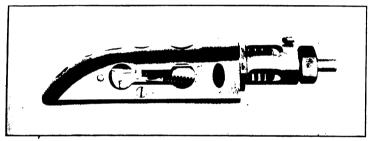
MODEL 1918 MARLIN LOCK CONTAINER AND TRIGGER MOTOR.
